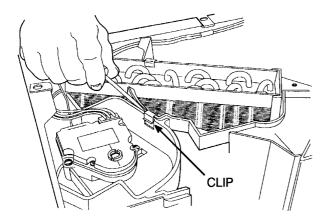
Clip Securing Cab Blend-Door Assembly to Bunk Blend-Door Assembly (Sleepers) or Dummy Housing (Daycabs)
